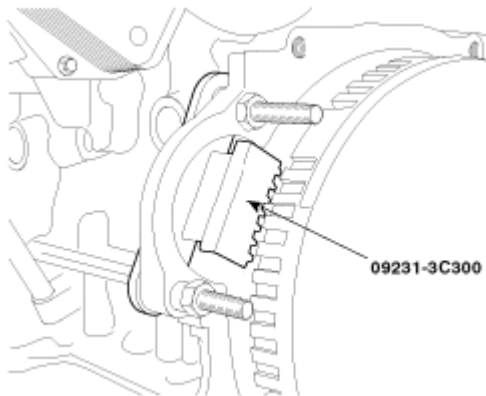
Identifying SST (09231-3C300) On Crankshaft Damper Pulley
